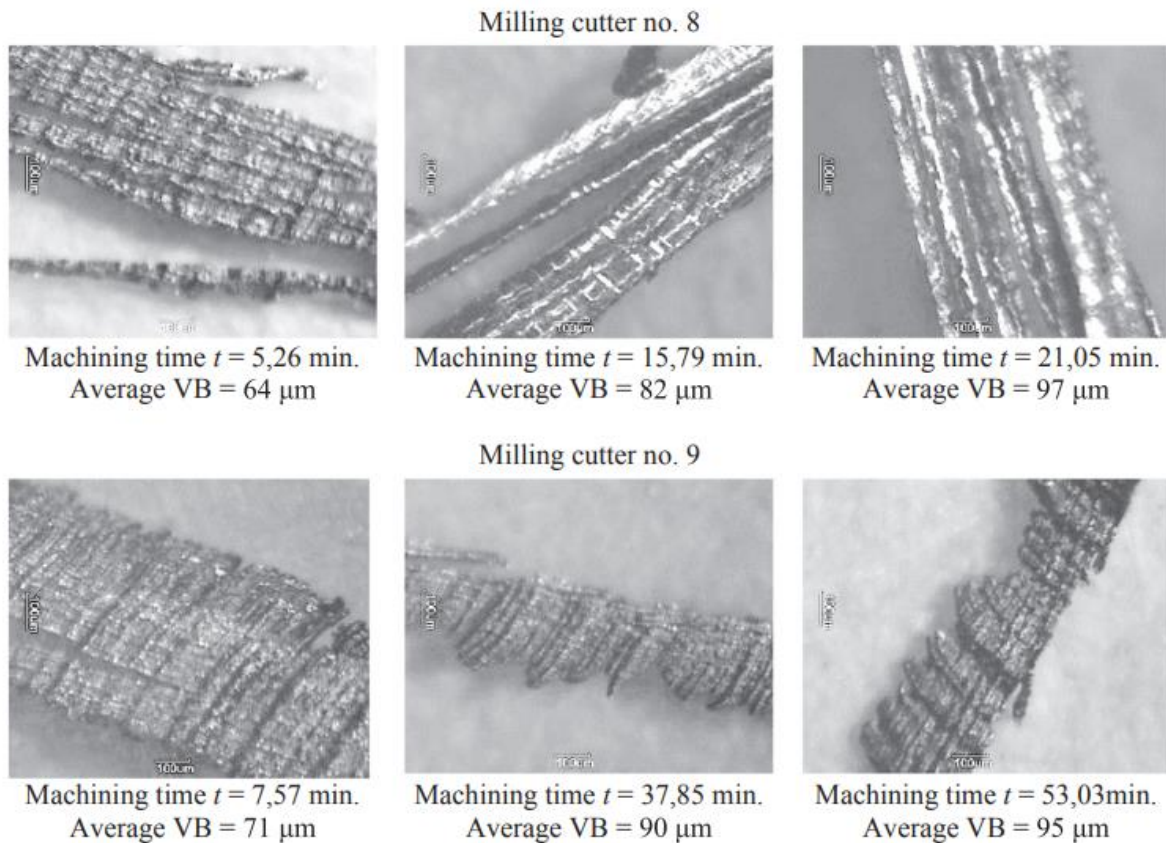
Changes in the chip shapes during machining with milling cutters no. 8 and 9.
